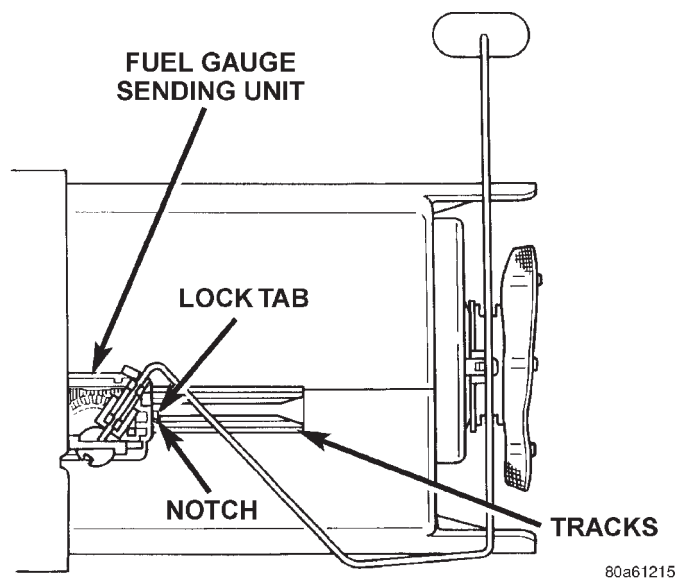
Fuel Gauge Sending Unit Lock Tab/Tracks
